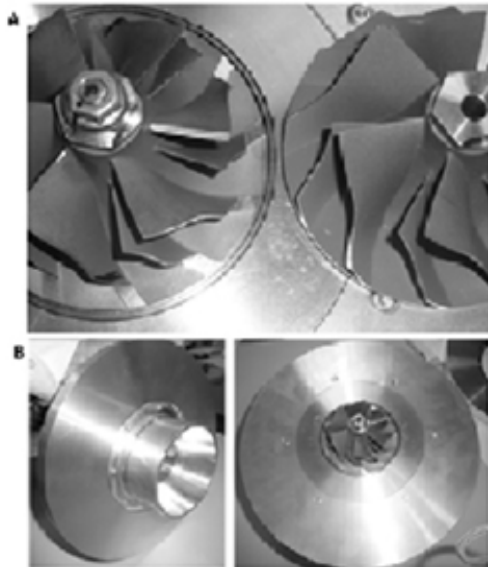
Photos of compressor wheel (a), front & rear disks (b)
